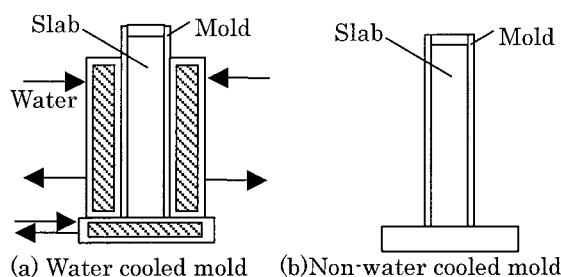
Schematic view of water cooled mold and non-water cooled mold.
